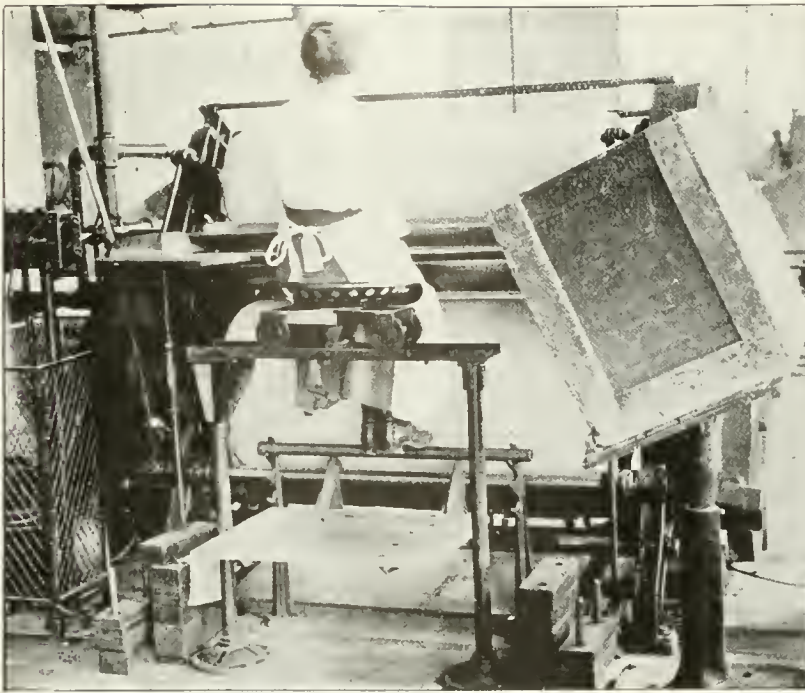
A type of sliding seat designed for a girl operating a collar ironer.
